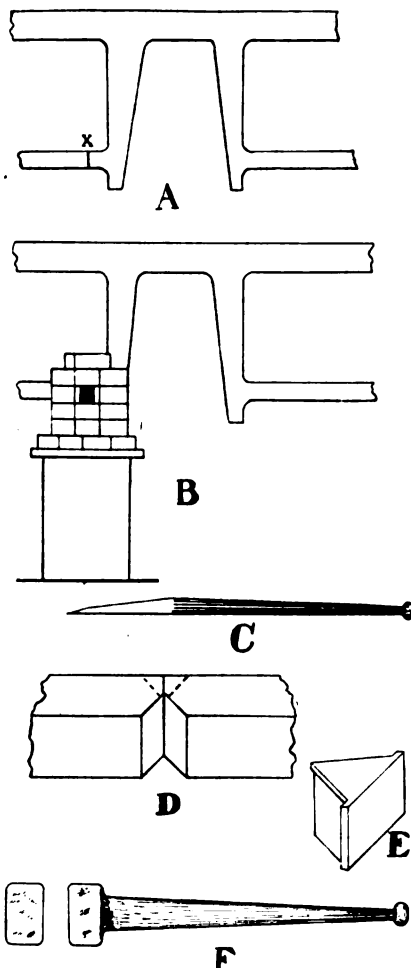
TOOLS USED IN WELDING LOCOMOTIVE FRAMES.
